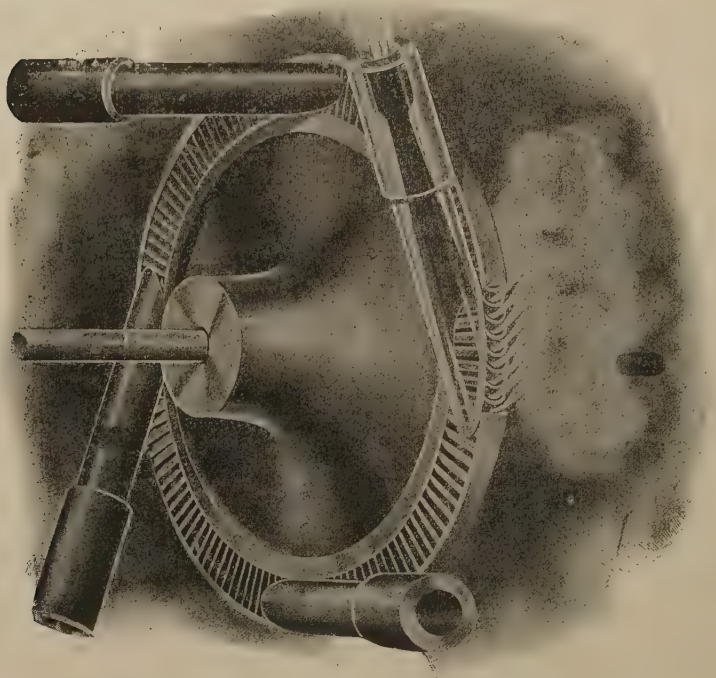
De Laval steam turbine, showing wheel and nozzles.
